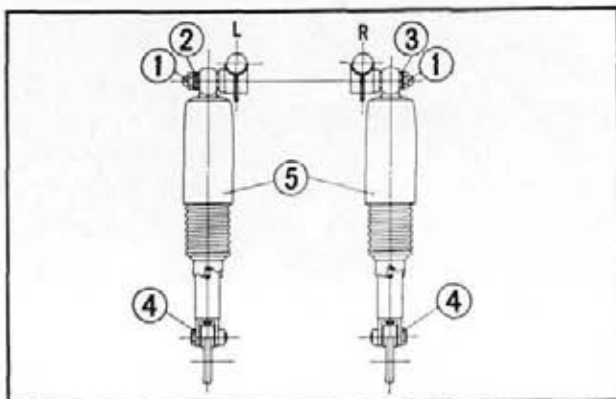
① 10 mm cap nuts ④ 10 mm bolts
